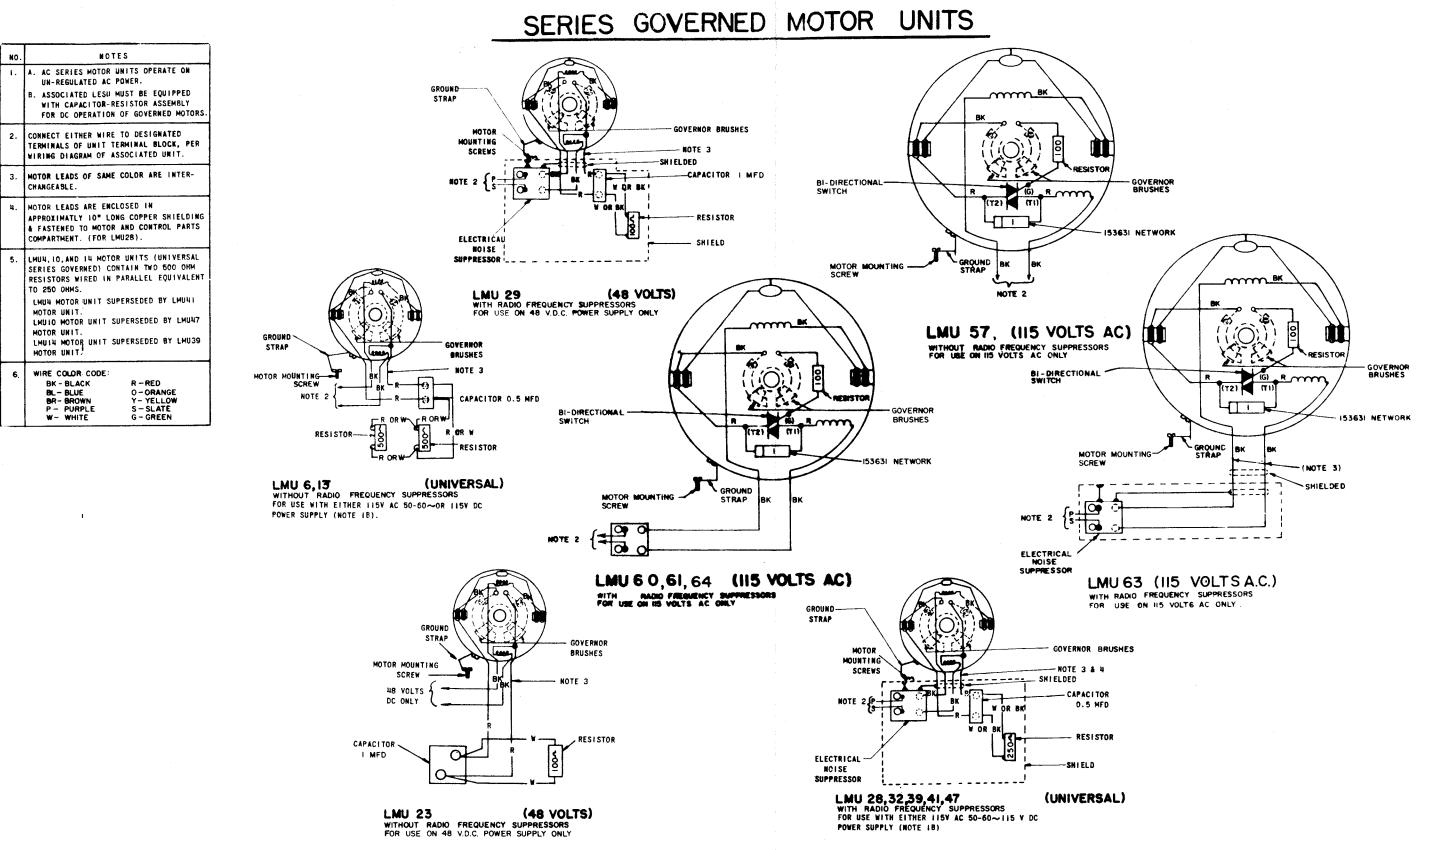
Motor Units Wiring Diagram (Sheet 2 of 2)
